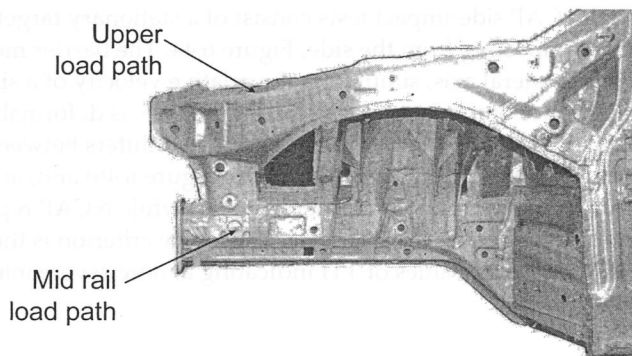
Example of upper load path. (Photo courtesy of A2Mac1.com, Automotive Benchmarking)
